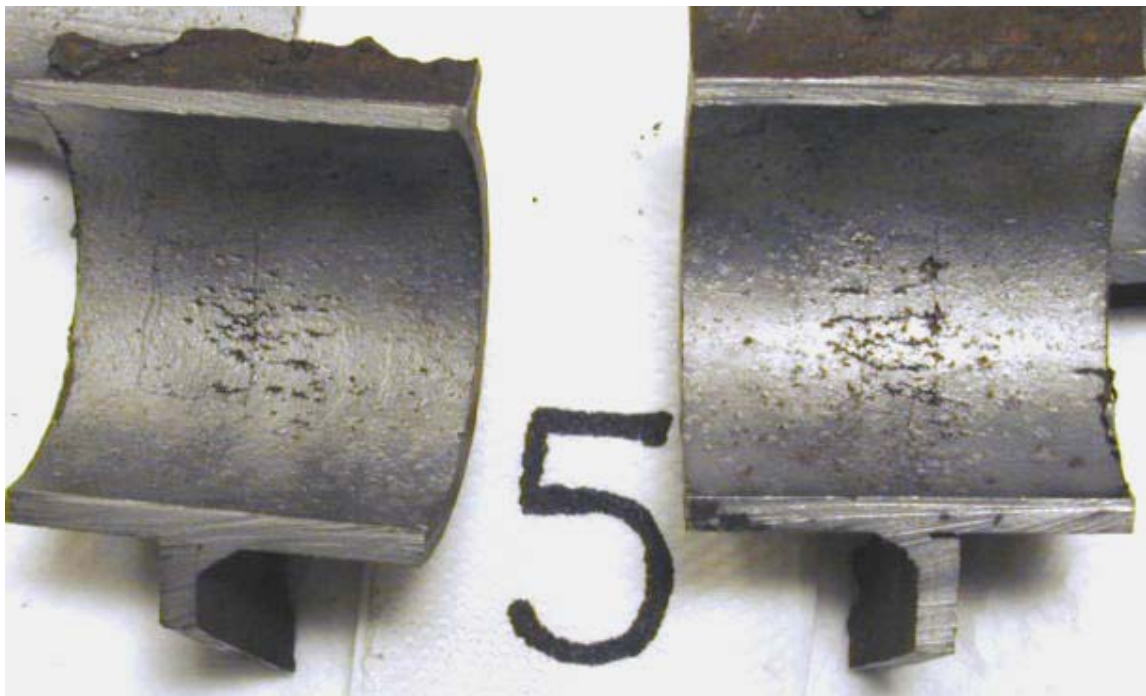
Section of two adjacent tubes # 5 showing SAC crack on their inner surface under the circumferential attachment weld. Notice that both adjacent tubes had SAC attack under the attachment weld at the same location.
